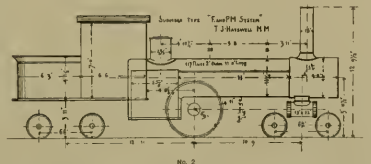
is an outline giving all the principal dimensions. The great economy of this engine is well illustrated by the following figures taken from the performance sheets.
